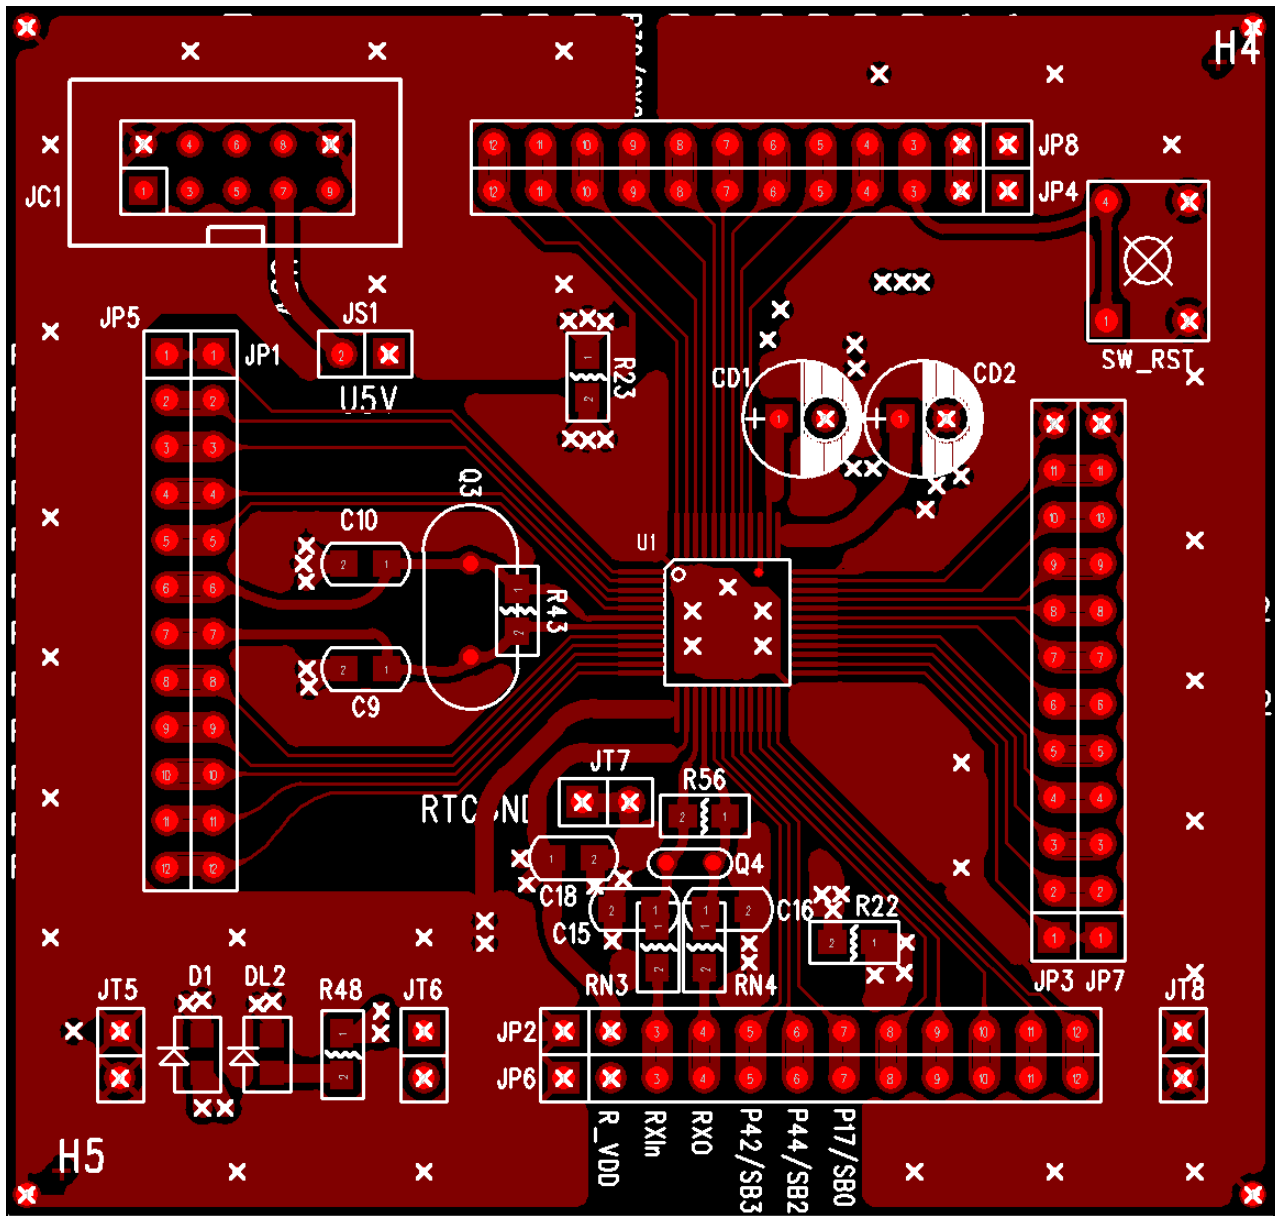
IS31CS8967A Evaluation Board PCB Layout - Top Layer
